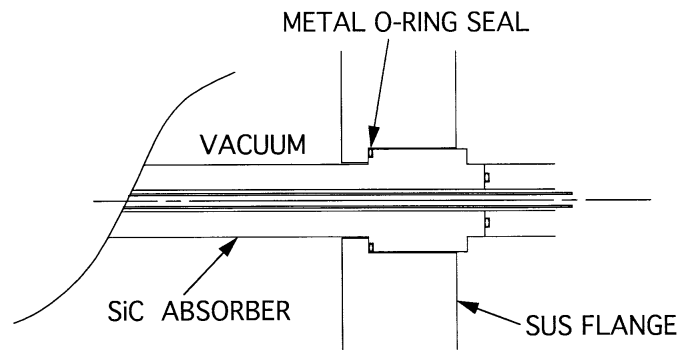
Prototype of the SiC absorber using a metal O-ring for vacuum sealing.
